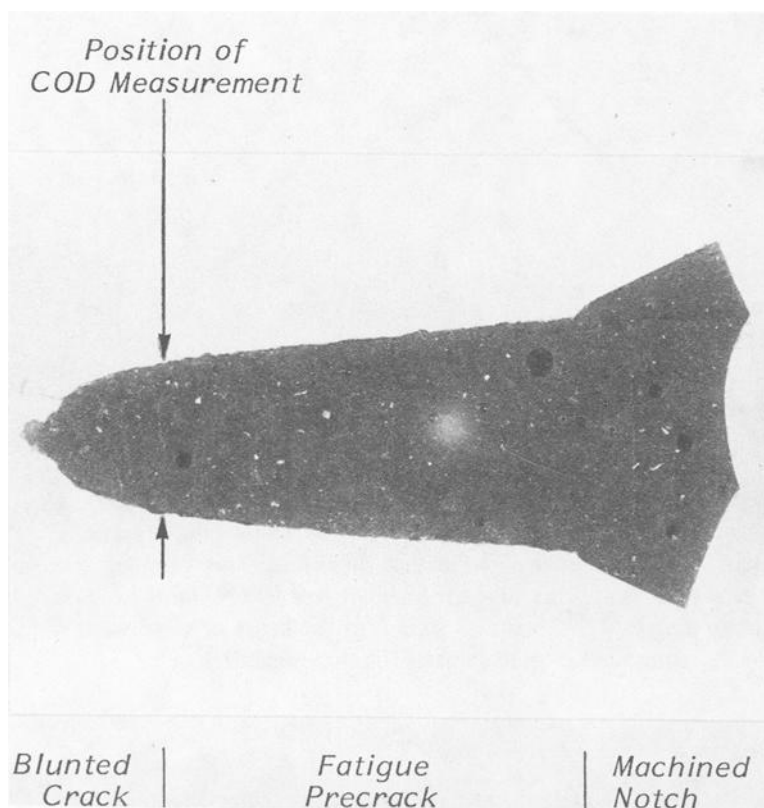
Rubber casting of crack in type 316 stainless steel at crack initiation, section at midthickness ( $\times 14$ ).
